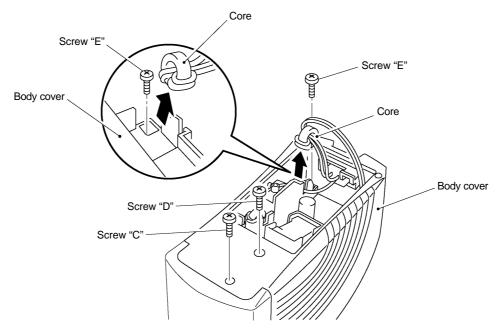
Reassembly of the Body Cover and the Bottom Cover
